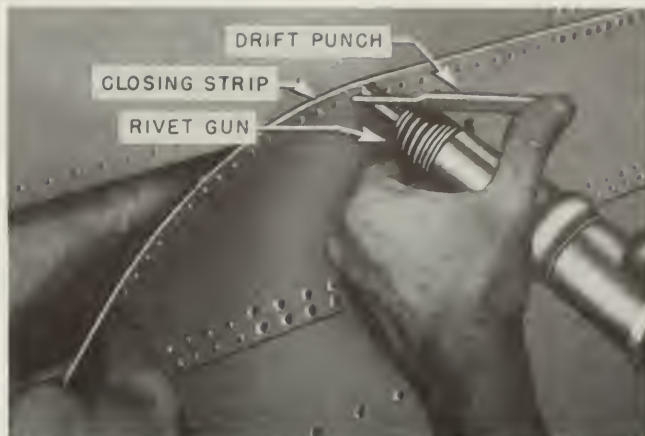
Use of Drift Punch When Riveting Closing Strip Skin
